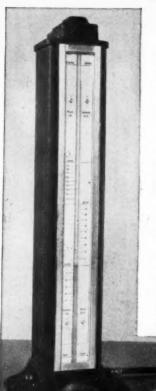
A typical air actuated comparator fitted with an internal gaging head. (Courtesy Federal Products Corp., Psovidence, R. I.)
